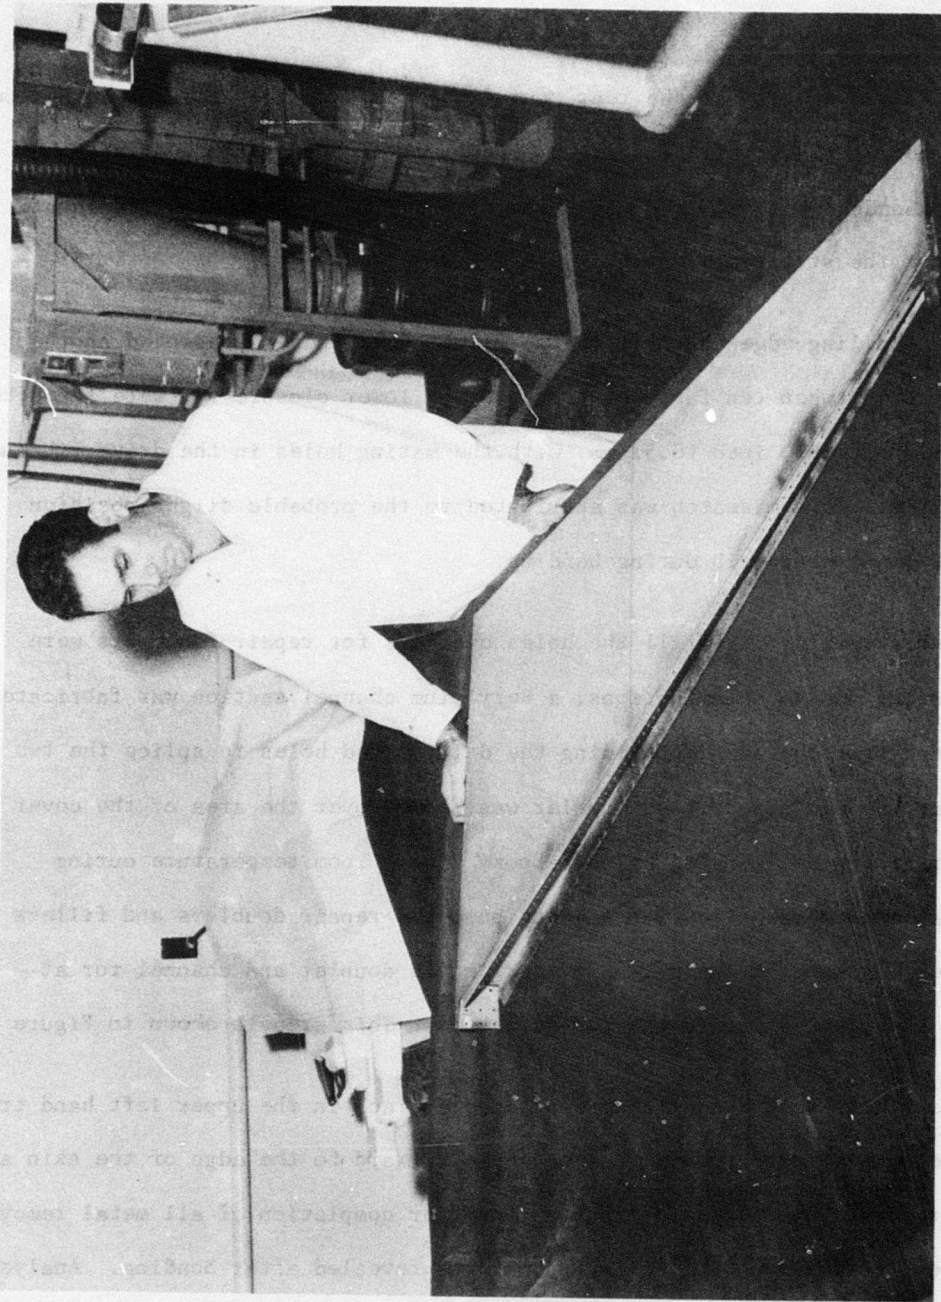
Beryllium Rudder Bonded Trailing Edge Assembly
